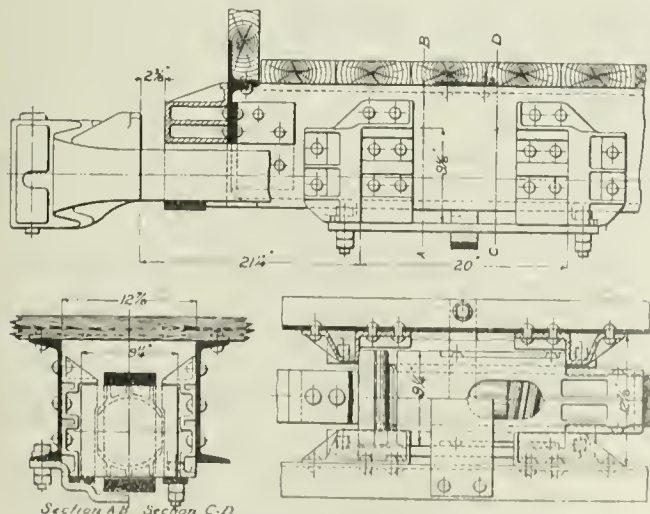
McCord Draft Gear as Applied to 100,000 lbs. Capacity Steel Car.
